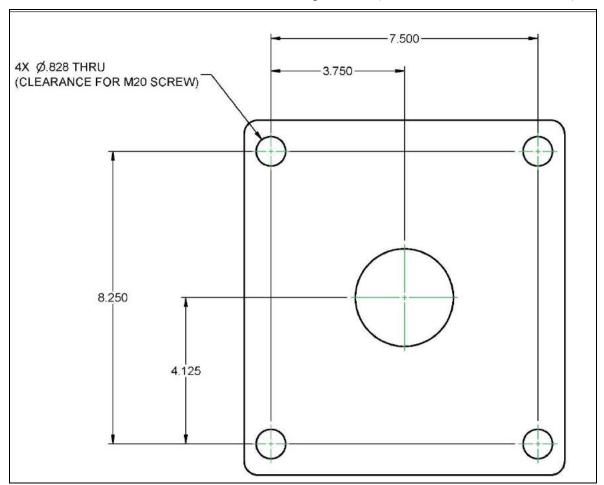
DIMENSIONS OF TACK WELD PLATES
